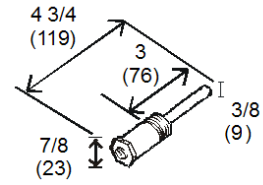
A99LY160C, -200C, -300C, and -500C Rod Sensor Dimensions, in. (mm)
